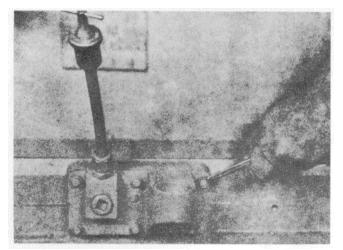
B-18. Remove the Oil Dipstick Gauge and Bracket
